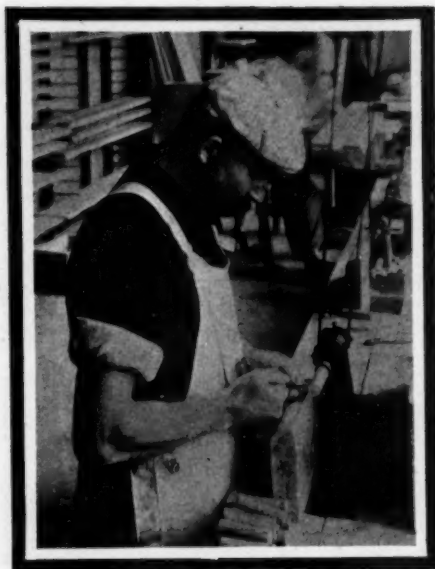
Showing the blanks in the process of turning, using soft steel for tools
